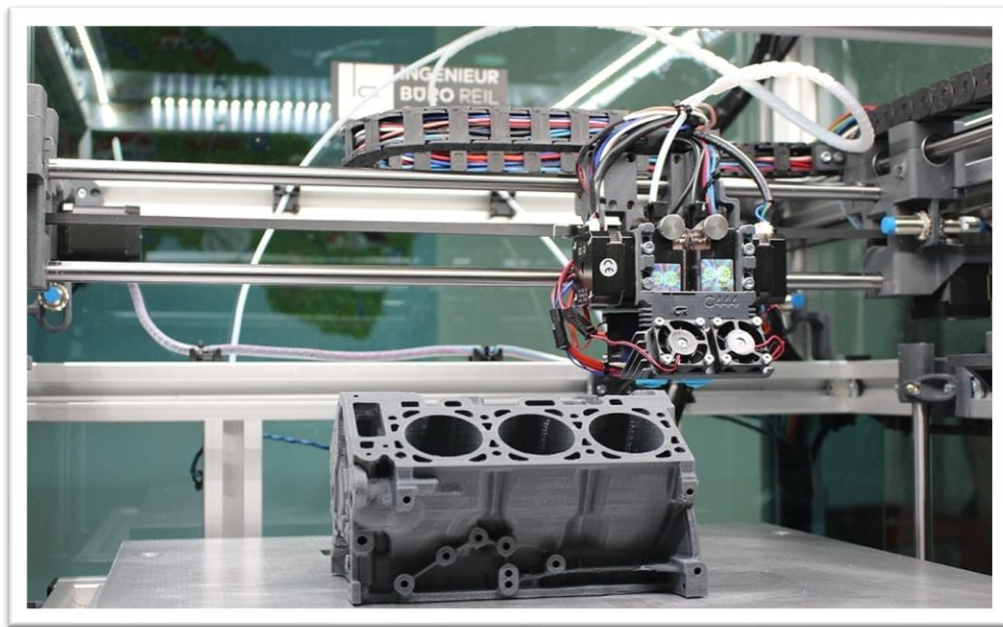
3D-Printer printing a 6-Cylinder engine block [43]
